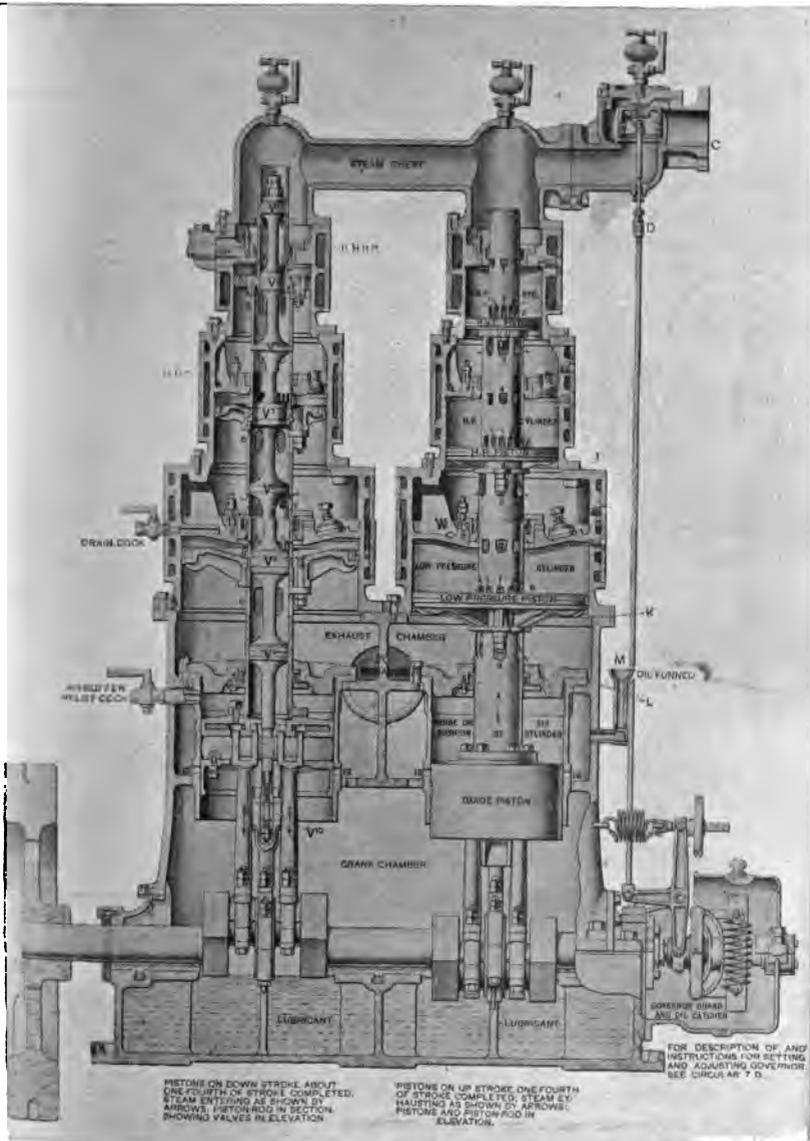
SECTIONAL VIEW OF THE "WILLANS" STANDARD PATTERN ENGINE.
